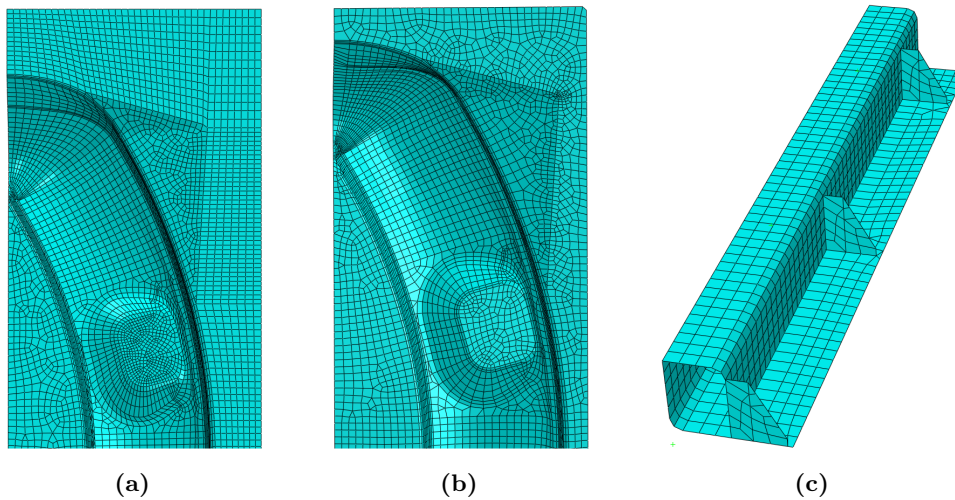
Mesh views: (a) Part, (b) Mold and (c) Frame
